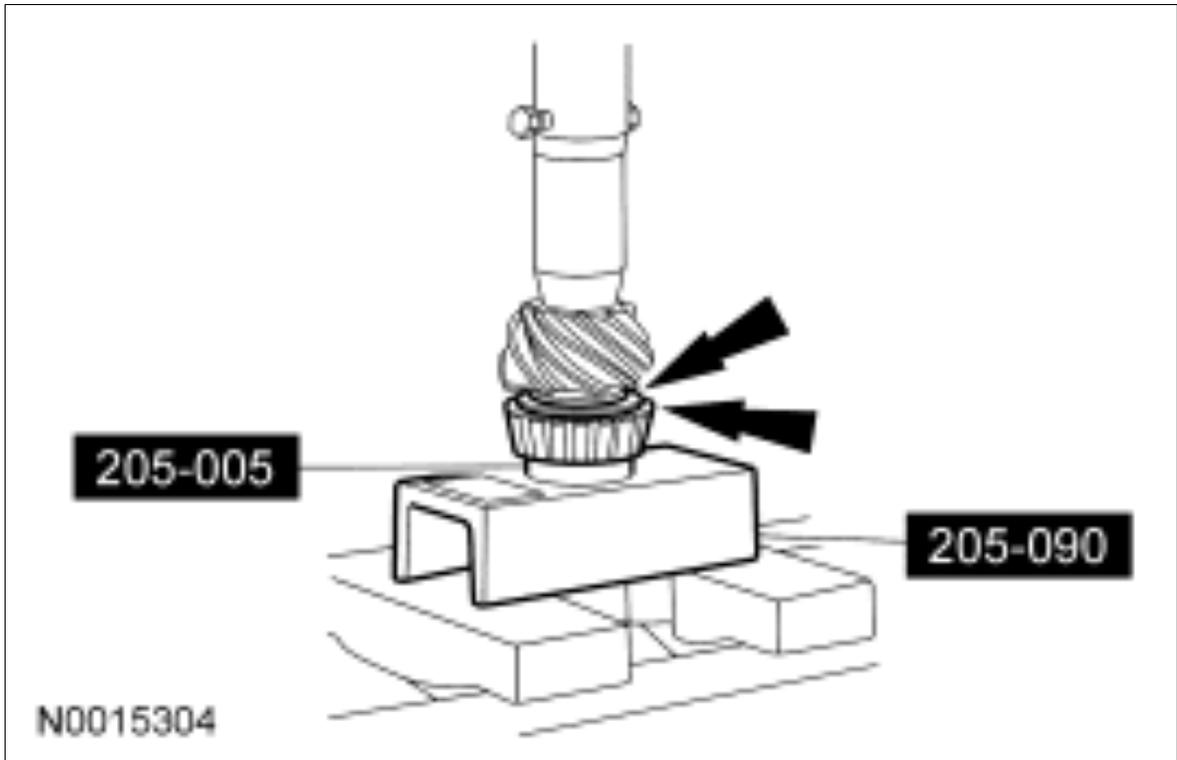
Identifying Drive Pinion Bearing Adjustment Shim
